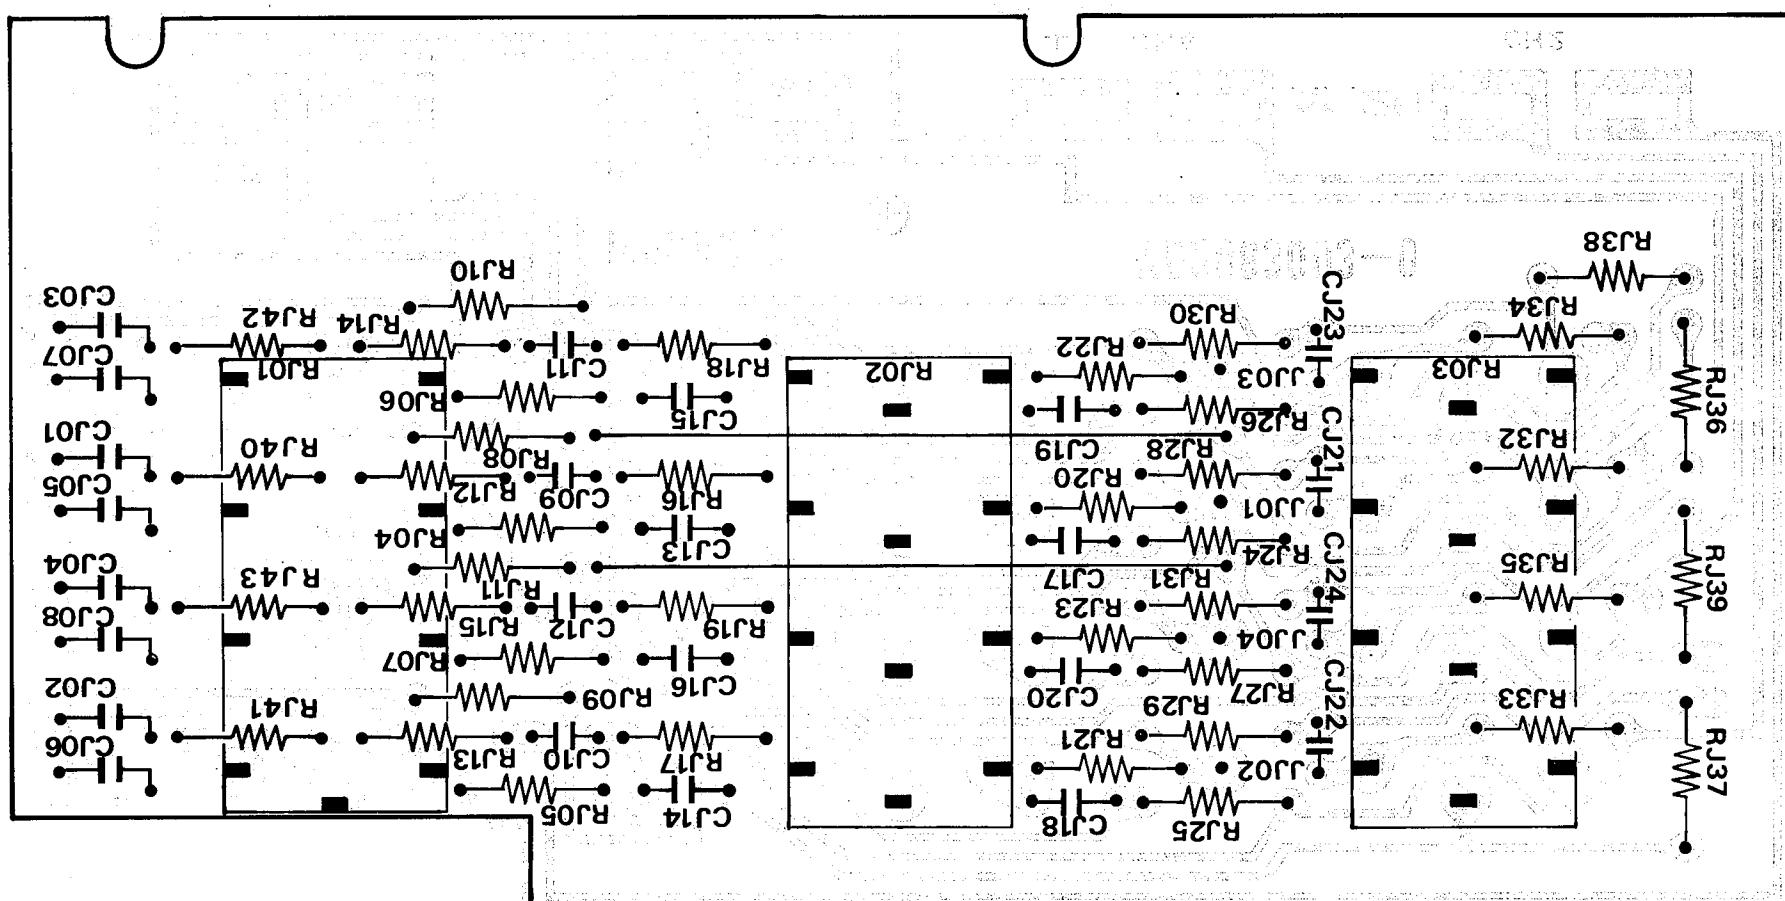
Tone Control Unit Assembly PJ01 Component Locations
